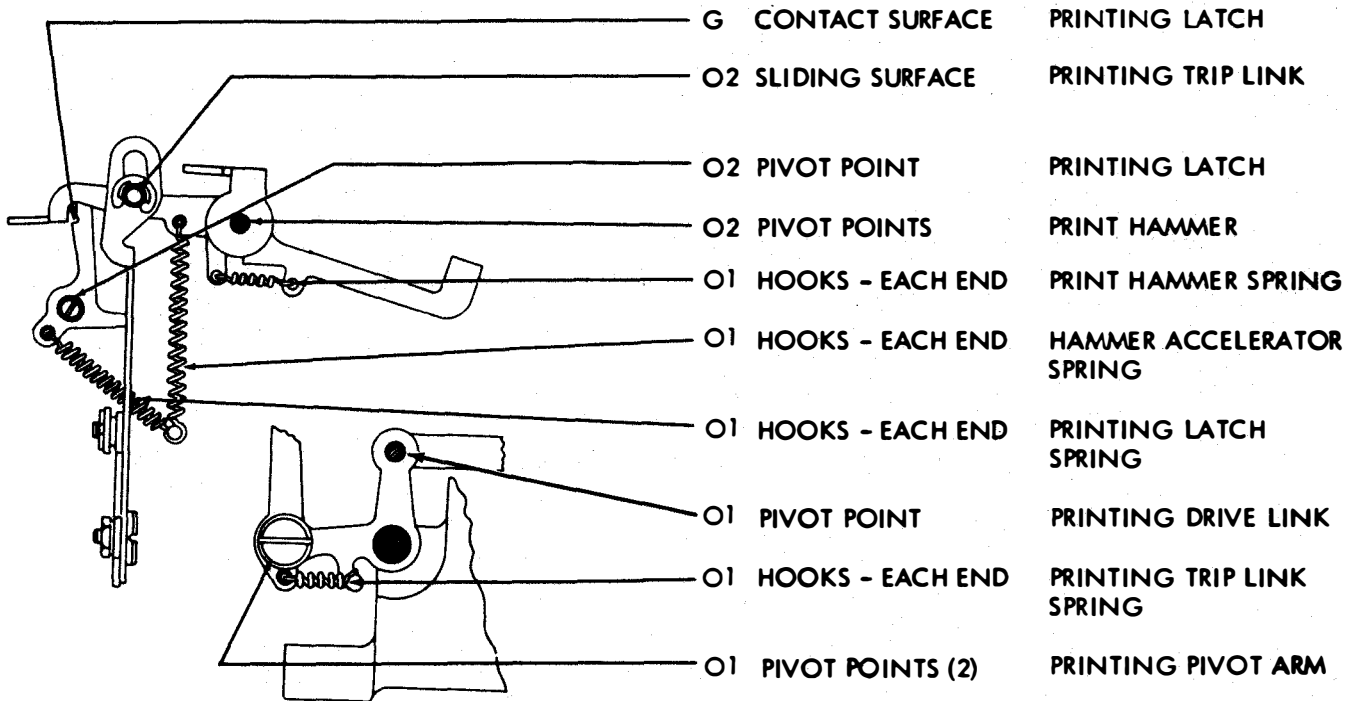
Printing Mechanism with Steel Print Hammer, Left Side View
